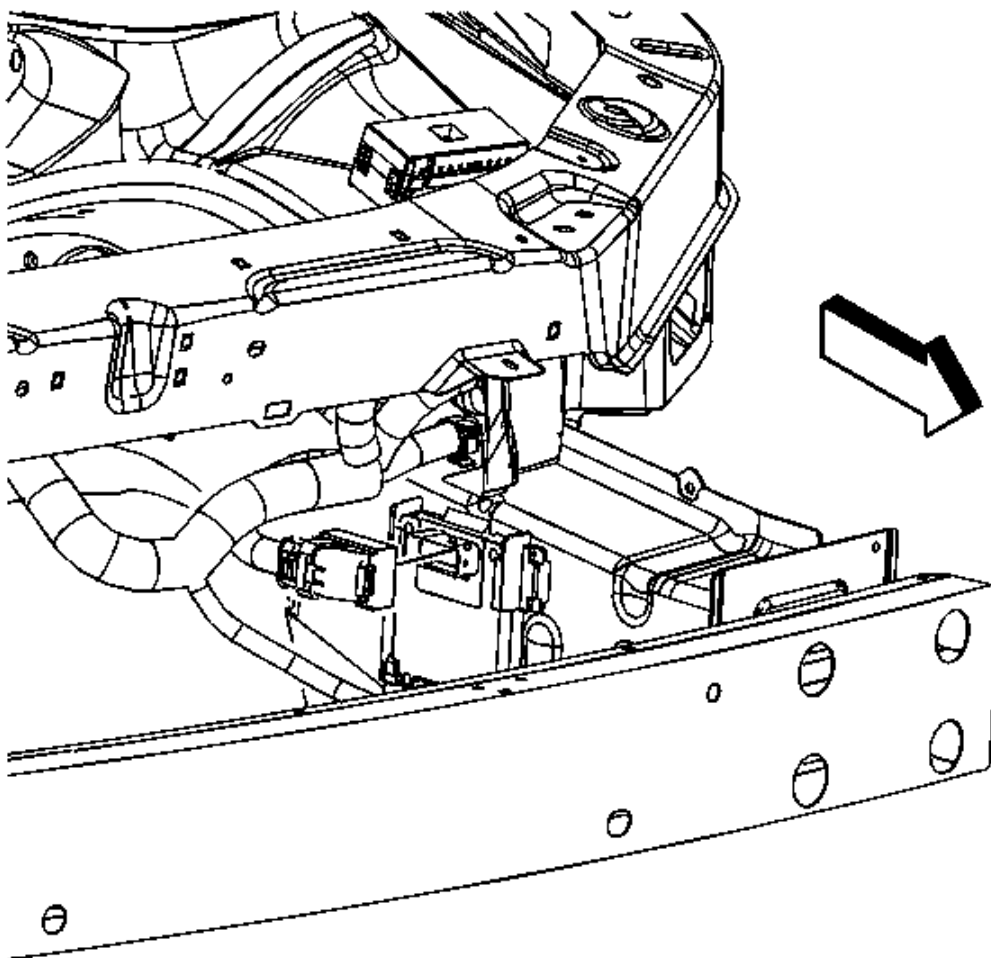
Identifying Engine Harness Electrical Connector & Transmission Control Module (TCM)
